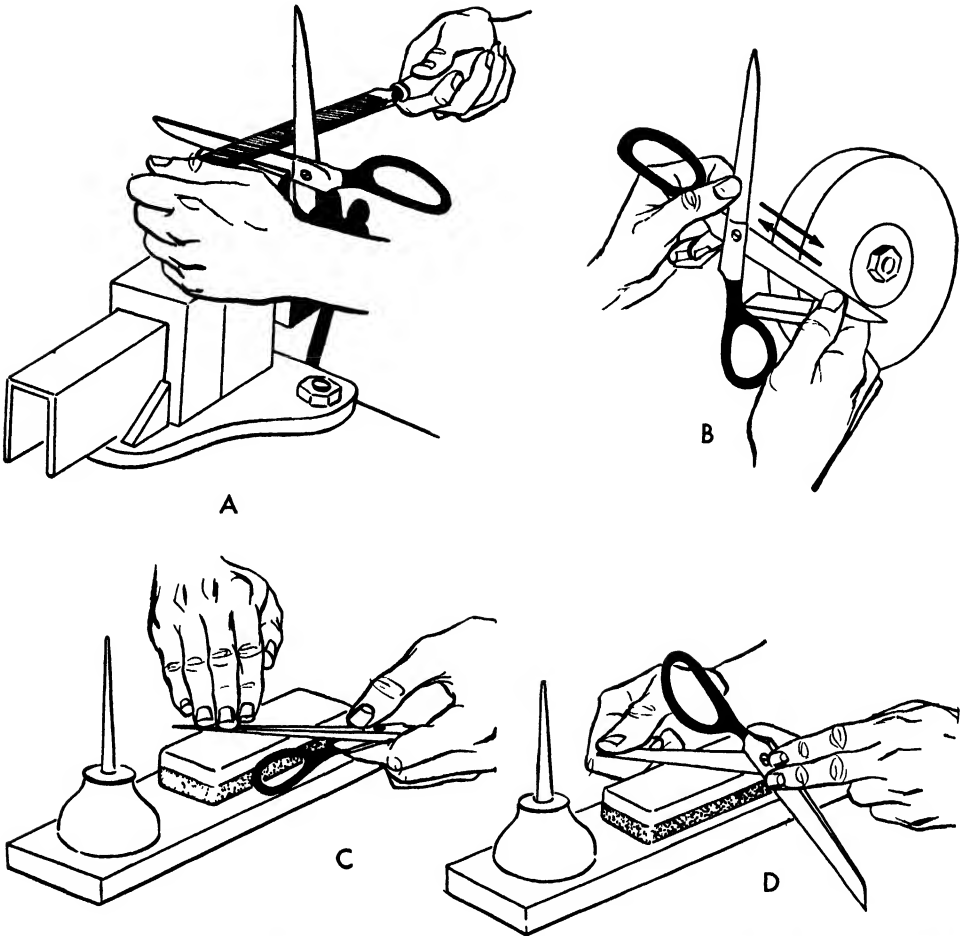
Scissors may be sharpened by filing or grinding the beveled edges and then finishing on the oilstone, alternately whetting the flat side and the beveled edge of each blade.
